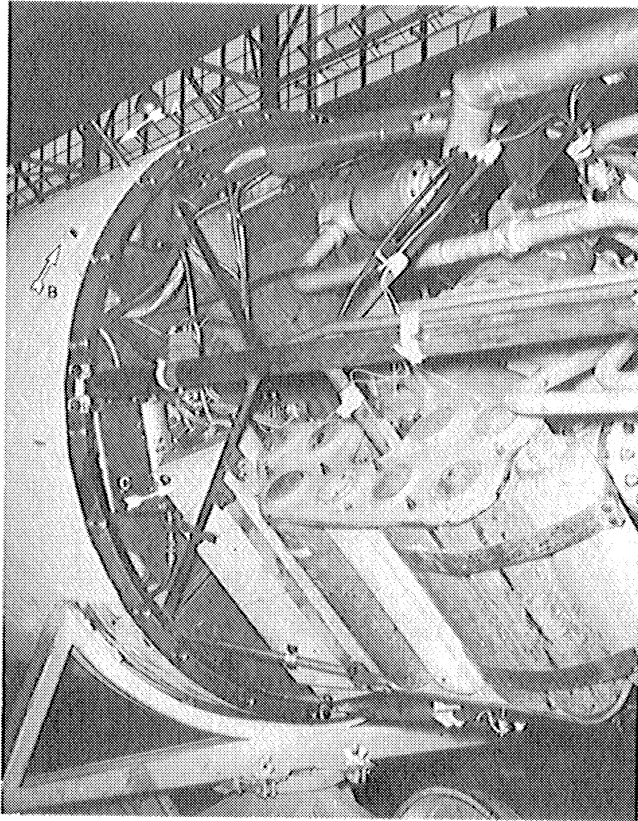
Sampling Bottle Installation in Motor Section of V-2
